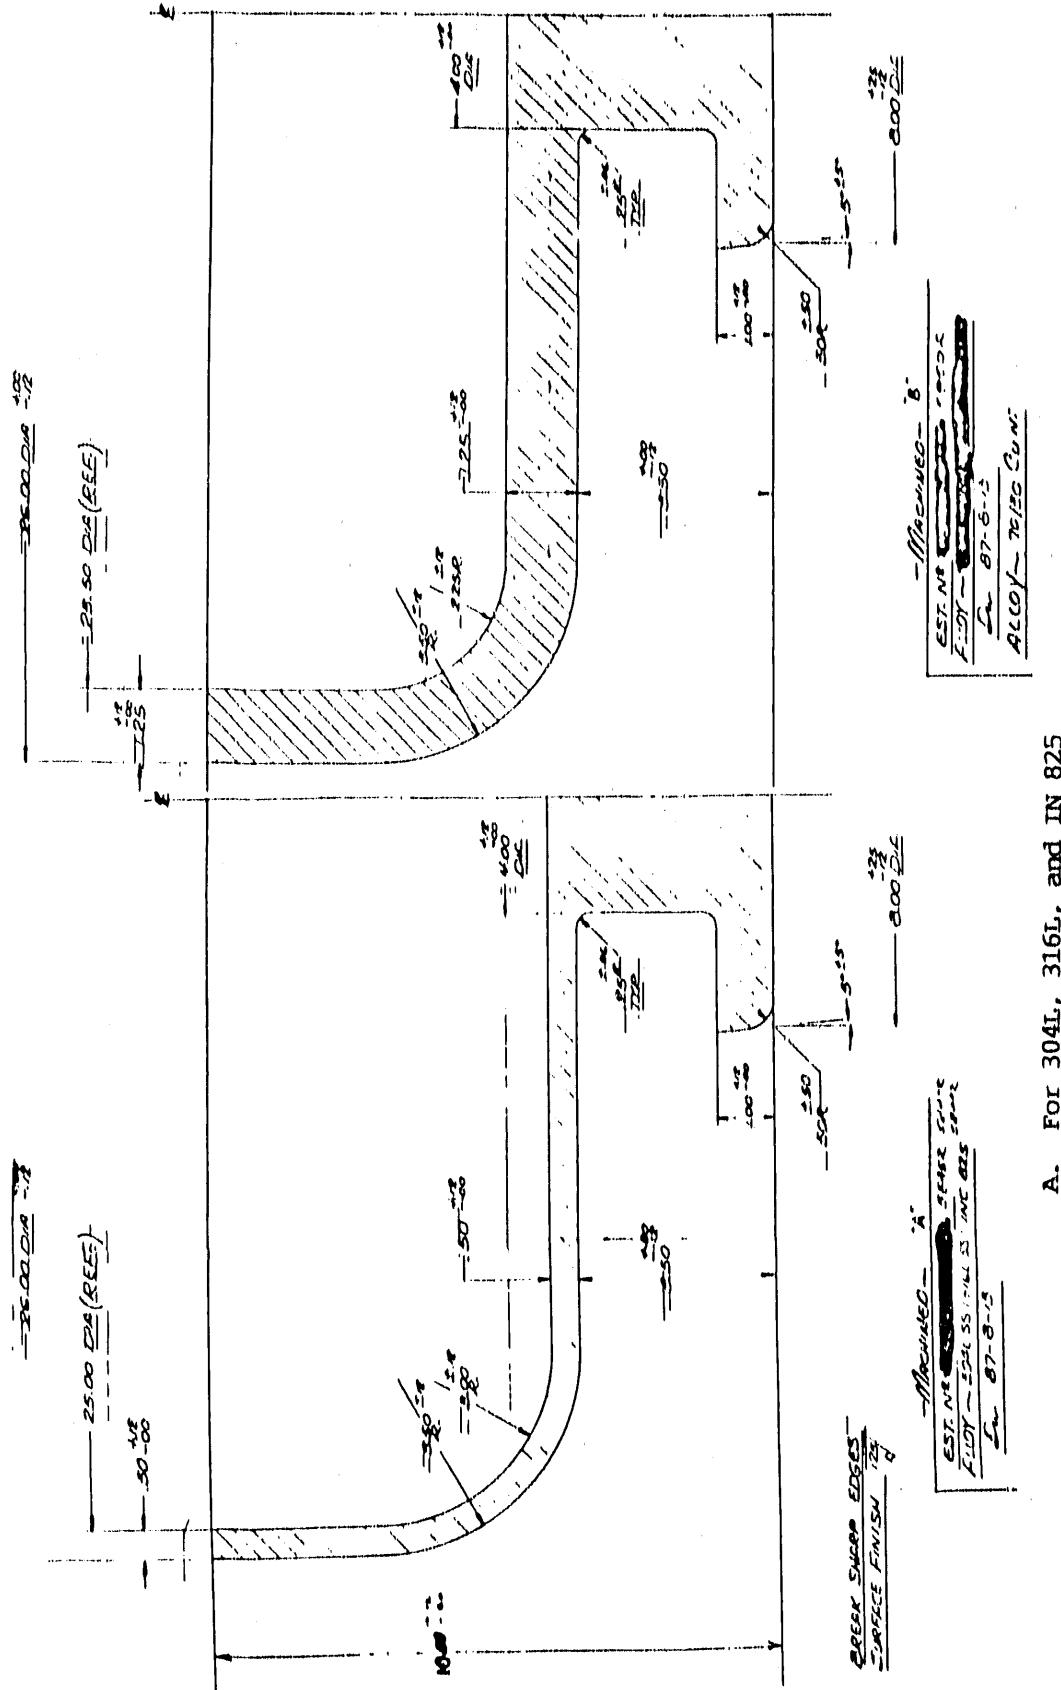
Alcoa Forging Division drawings for integral pintle and head forging quotes
